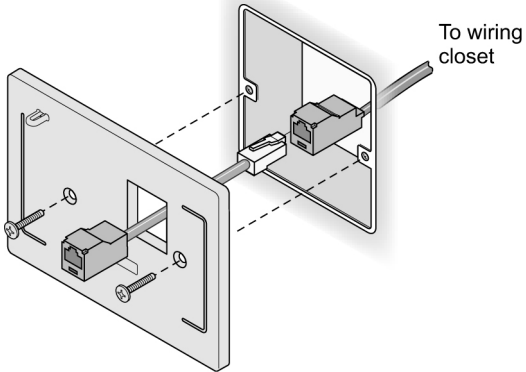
Installing the Universal Wall Plate (with Coupler Cable)
